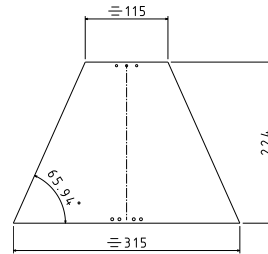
Payload bay door Panel for TFSC side dimensions
